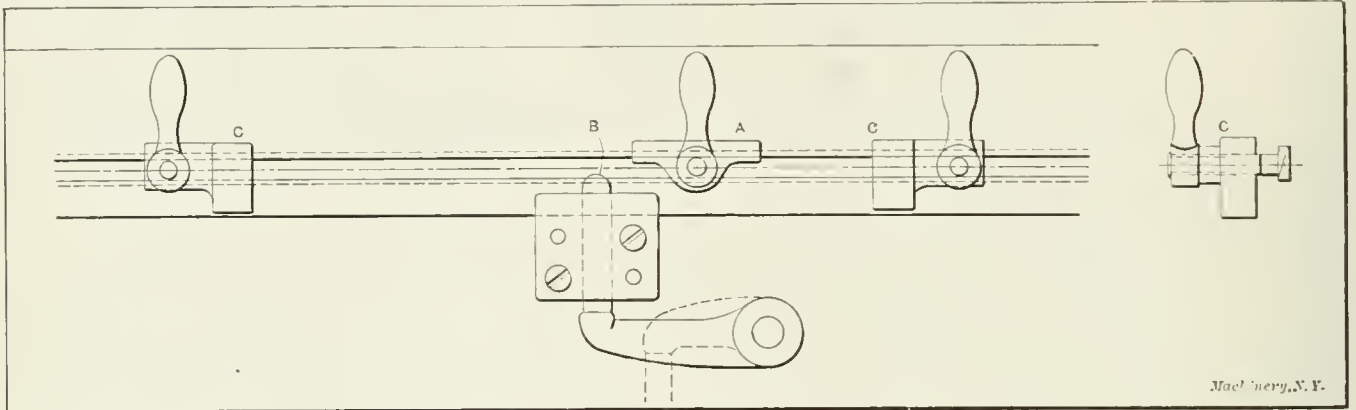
Combined Trip and Dead Stops for Milling Machine Table
